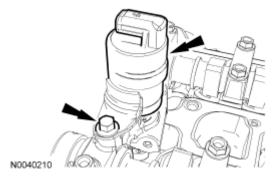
Locating Variable Camshaft Timing (VCT) Solenoid And Bolt Courtesy of FORD MOTOR CO.
